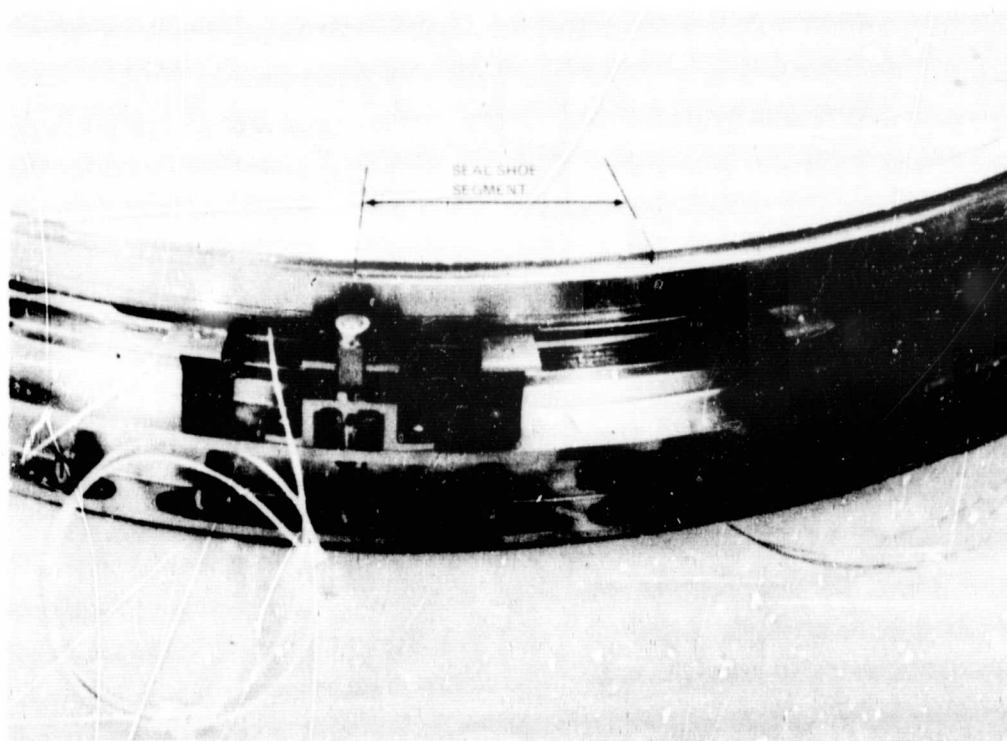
Side View of the One-Side Floated-Shoe End Seal (CN14386)
